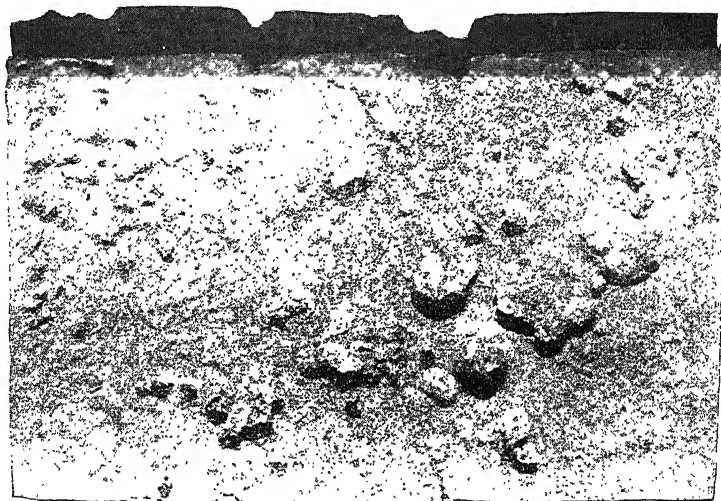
Actual pitting of tube in water-tube type of marine boiler.
